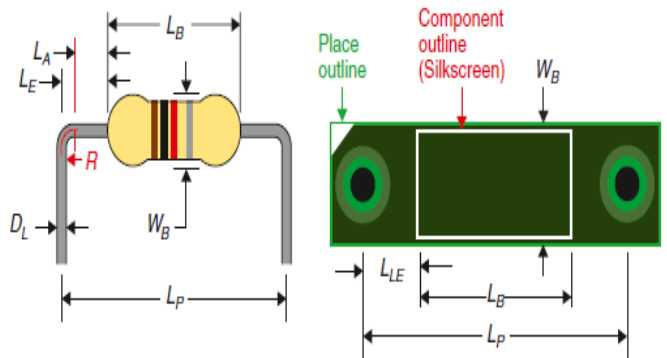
Generic footprint designparameters for axial leadedcomponents.
